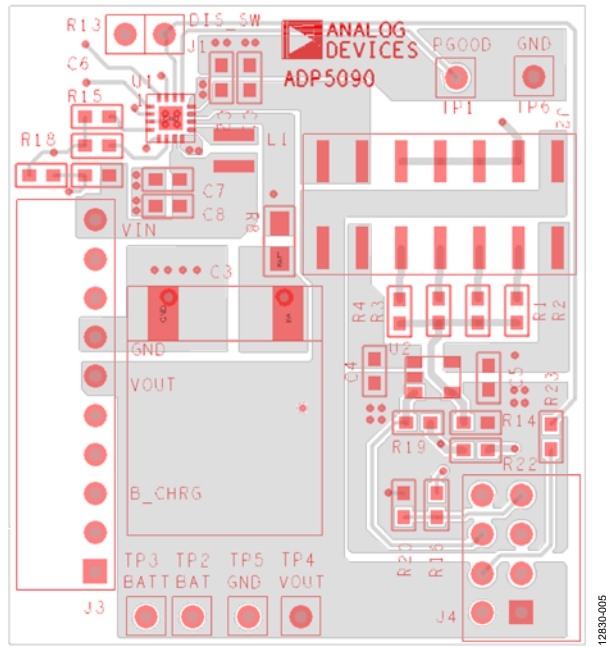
ADP5090-2-EVALZ Evaluation Board Top Assembly
